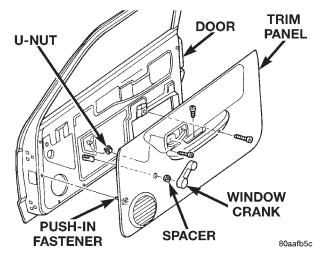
Front Door Trim Panel Remove/Install - Manual Window
